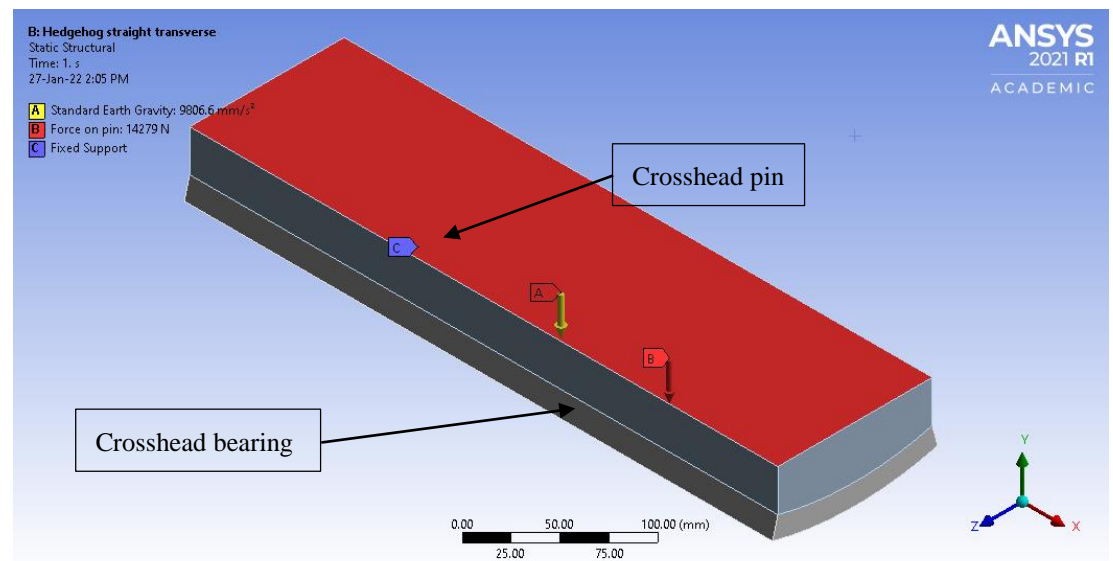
3D drawing of the setup showing the partial crosshead pin and partial crosshead bearing
